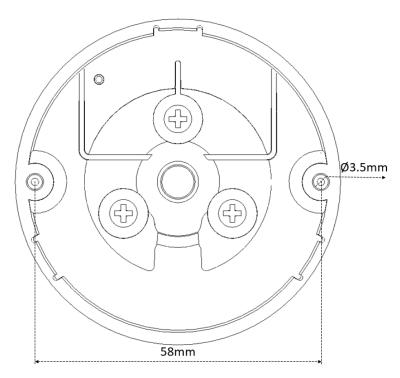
Modbus Gas and TrueVOC Sensor Mounting Holes - Swivel Mount
